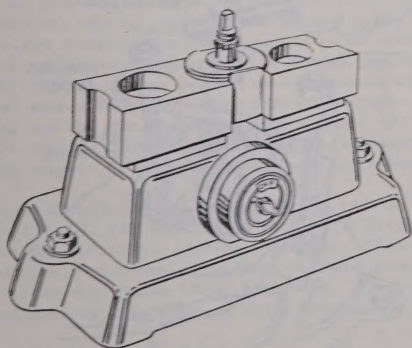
Magnetizing Standard Two-pole Rotor with Bar Magnets. To magnetize standard two-pole rotor with block magnets, use same setup but reverse charging blocks.
